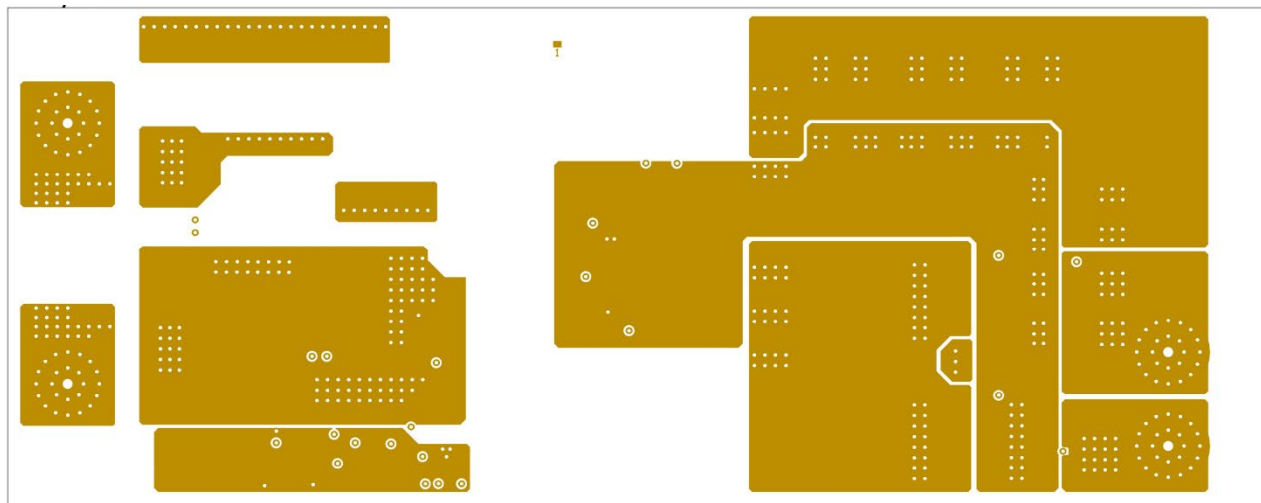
DER-953Q Mid-Layer 1 PCB Layout.
